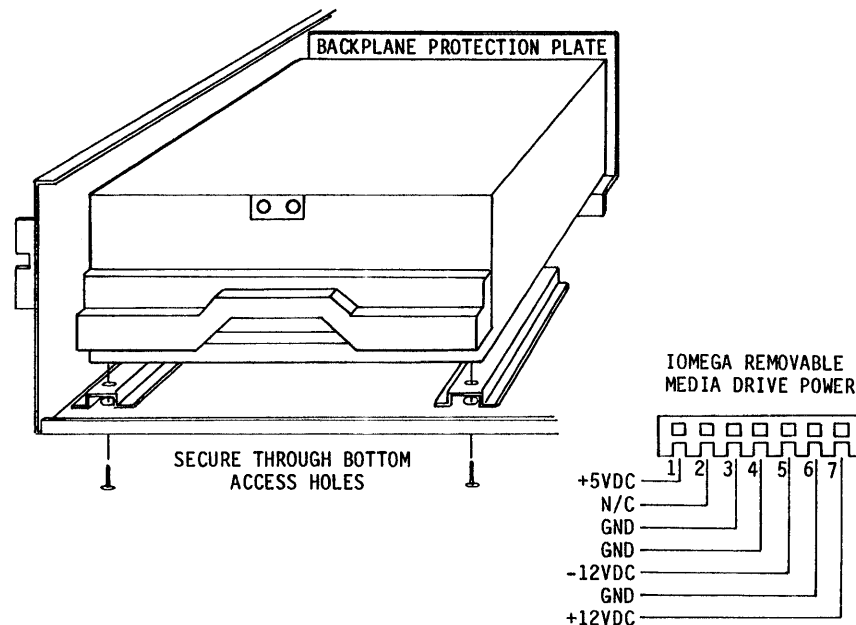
8" REMOVABLE MEDIA DRIVE INSTALLATION
